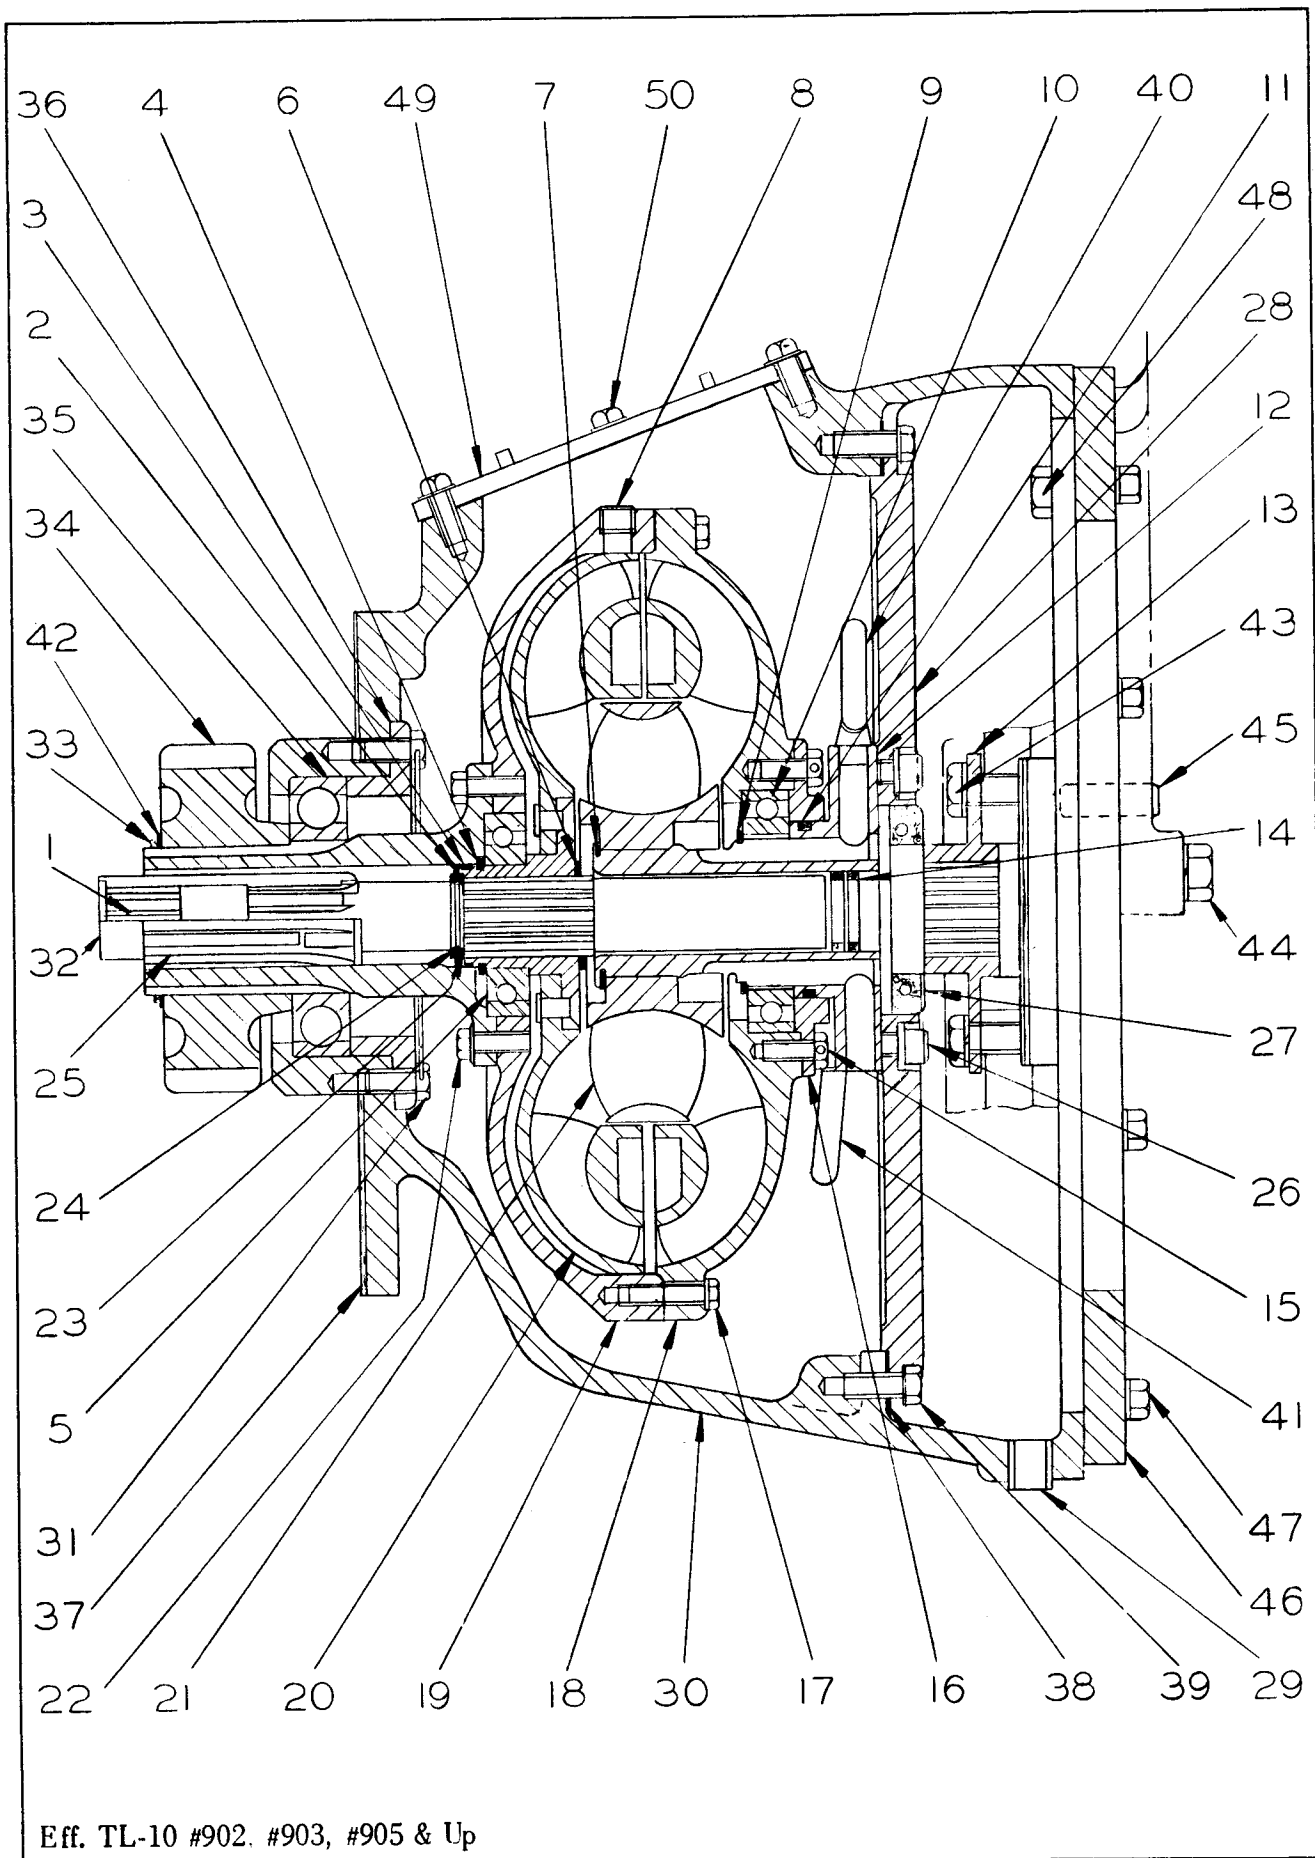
TORQUE CONVERTER AND FLYWHEEL HOUSING
